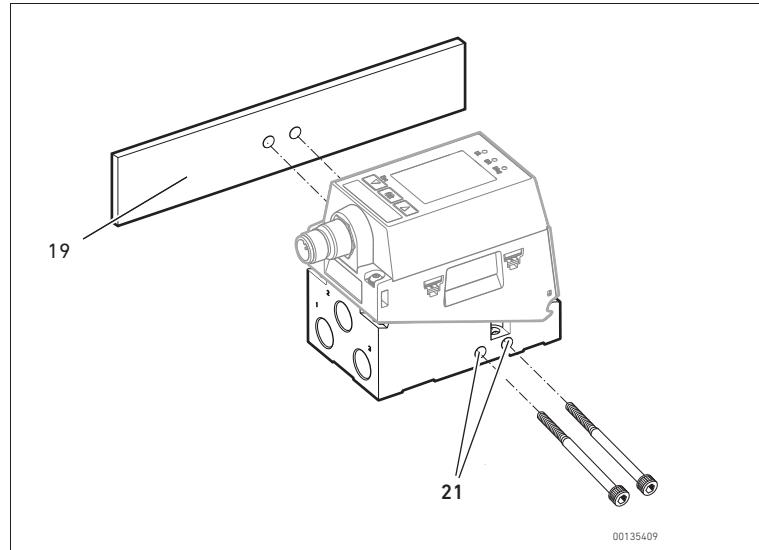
Mount the EV03 with screws through the through holes on the sides on a mounting plate.
